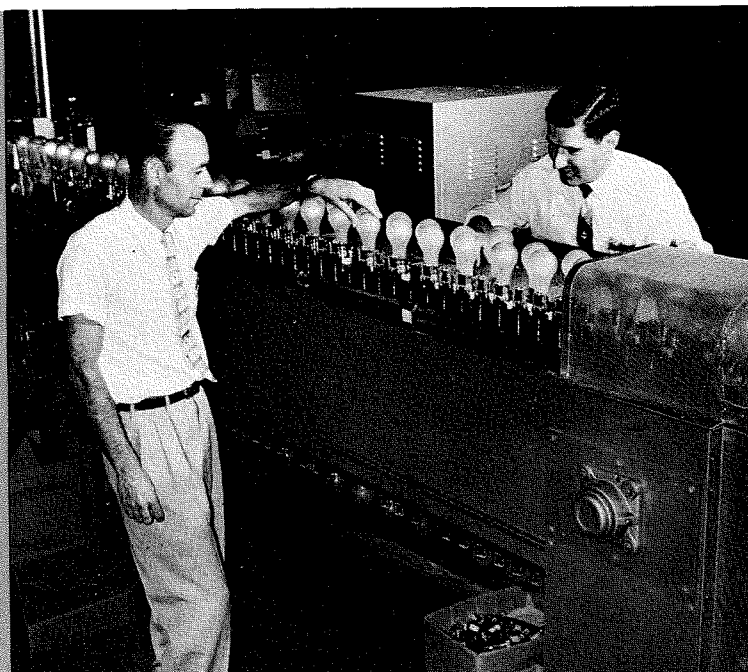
Foreman Fidel Dunne (left) is checking aging panel for socket and continuity as Manufacturing Engineer Milton Nachbar operates the spot-knocker controls on the continuous ager-spotknocker-tester for type 6AX4-GT damper tube.
